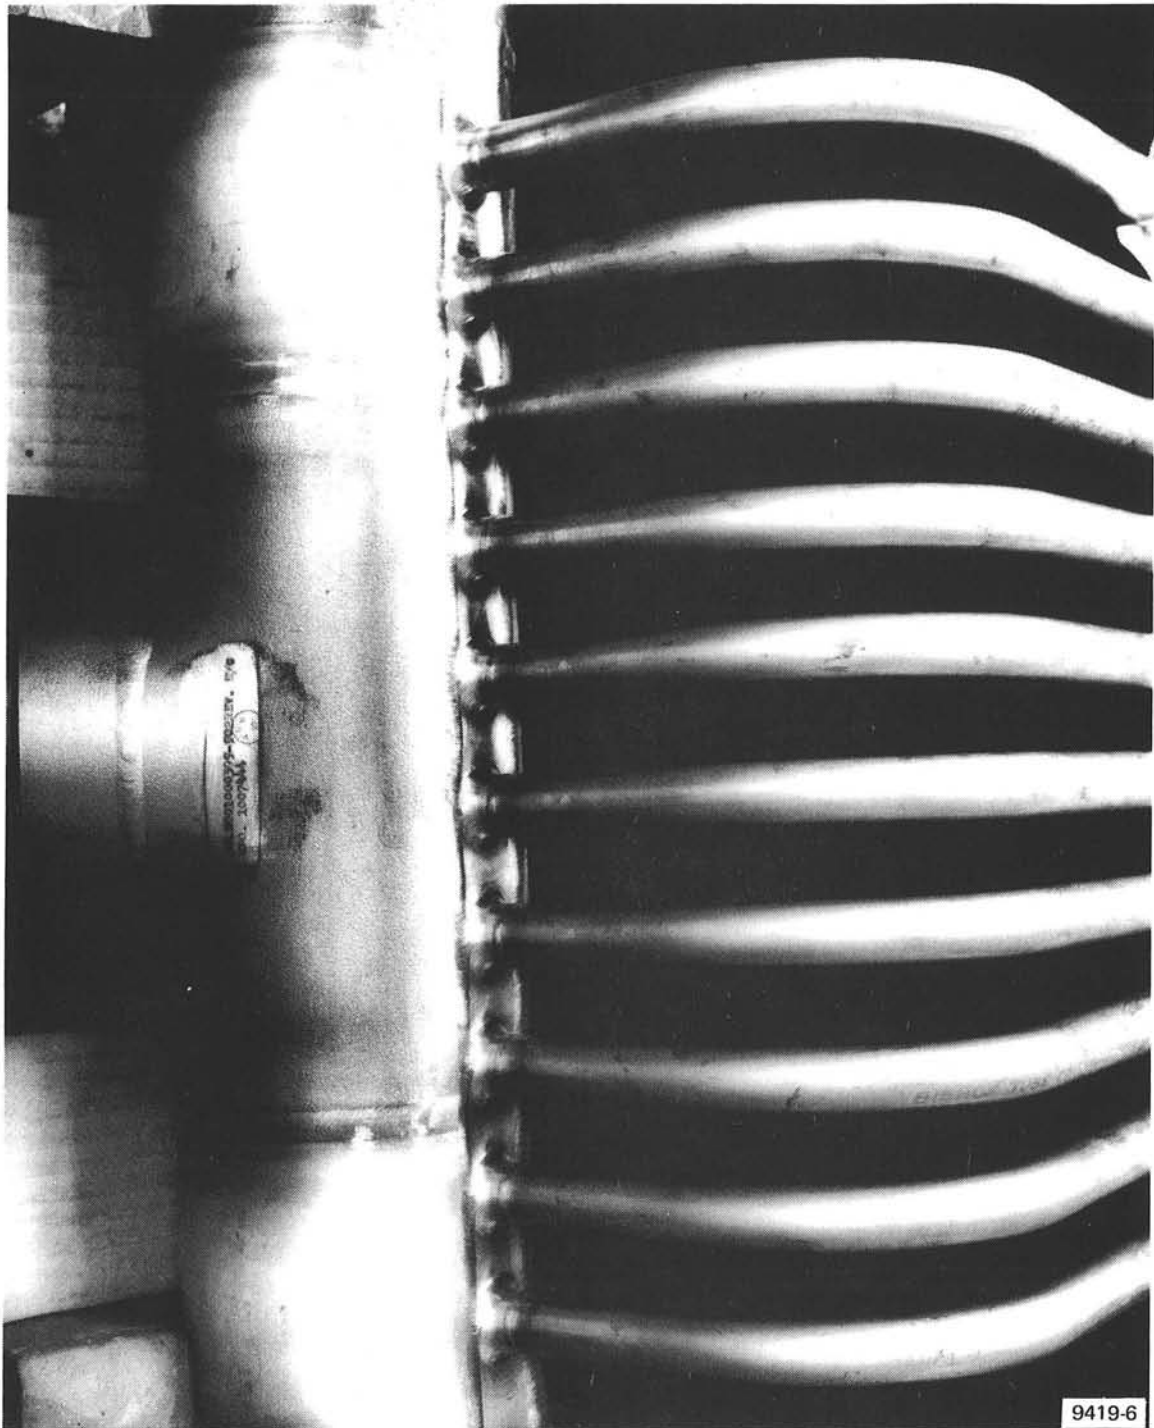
Tube-to-Manifold Butt-Weld Assembly
